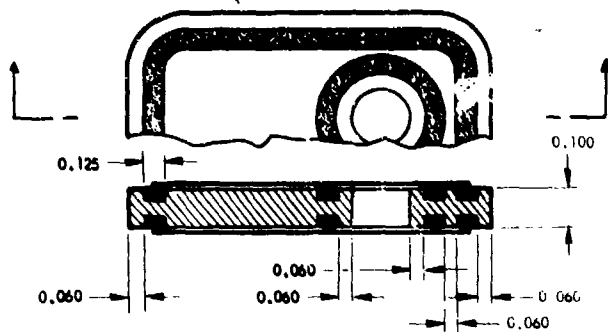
Dimensional Requirements for Molded Shape Gasket
